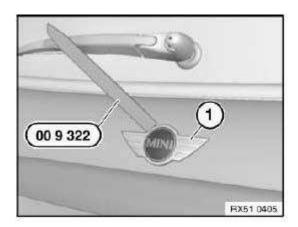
Identifying MINI Badge And Special Tool 00 9 322 Courtesy of BMW OF NORTH AMERICA, INC.
